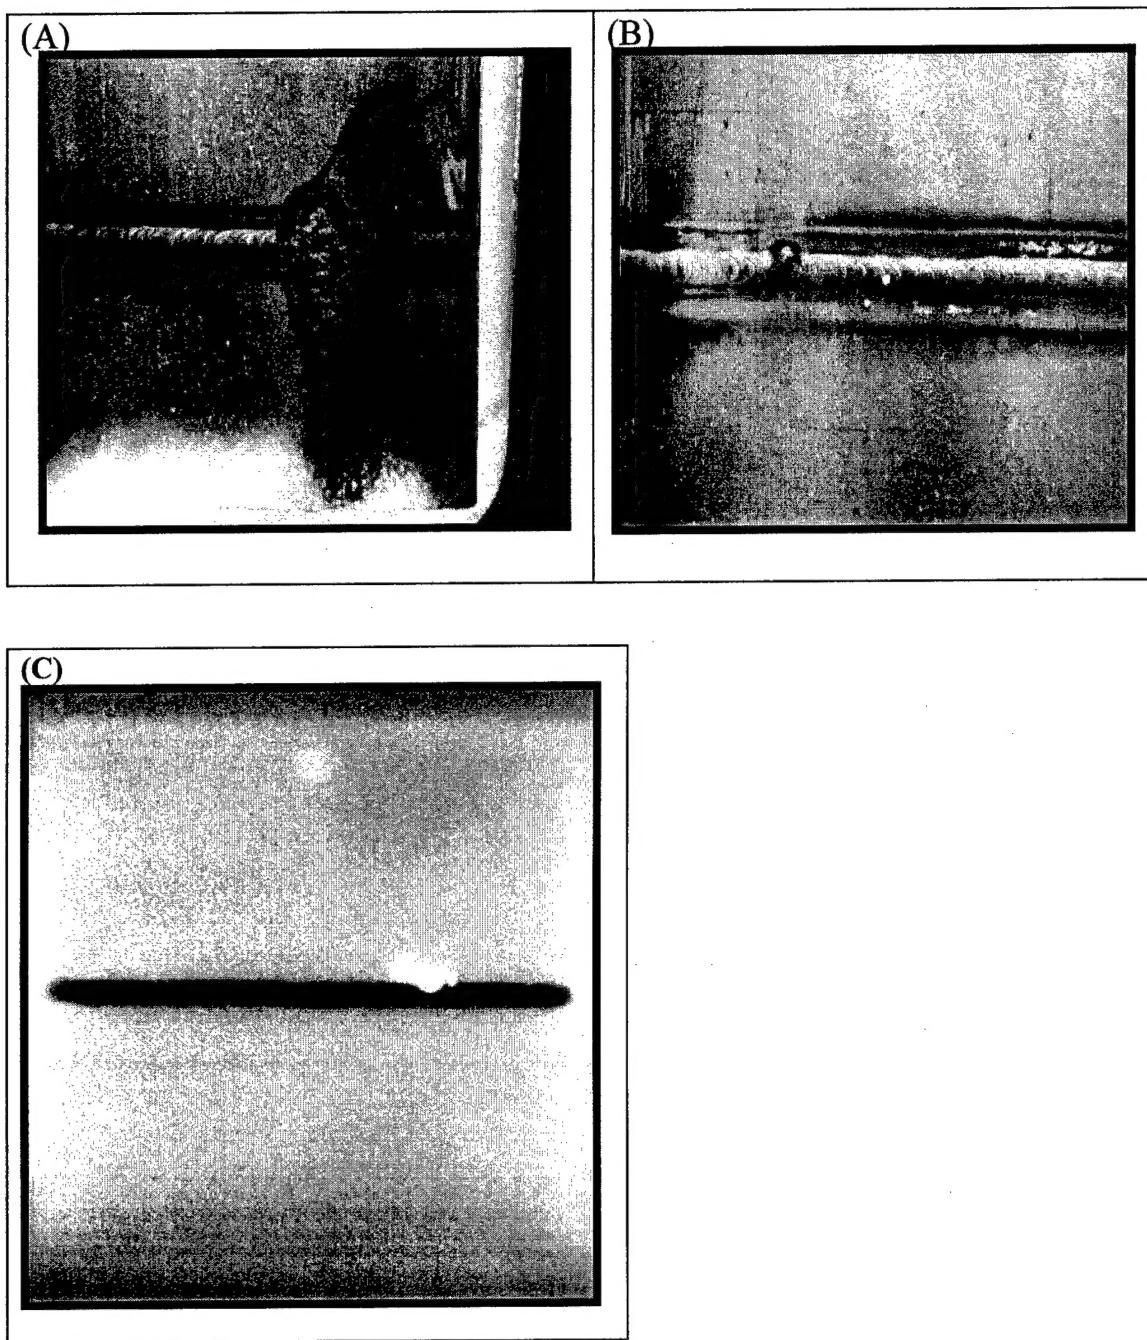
316L stainless steel coupon with a center weld exposed to flowing seawater for 10 weeks:
